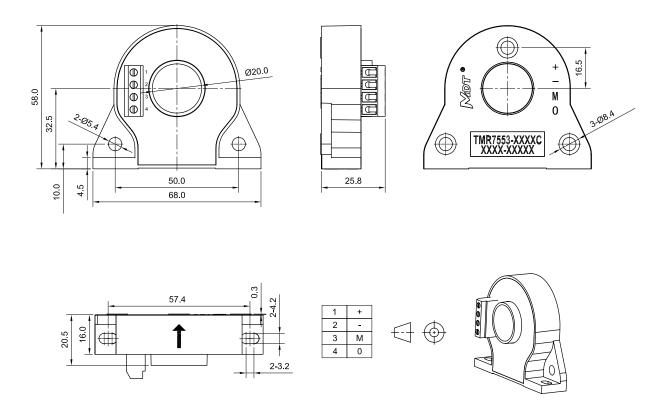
Dimension (unit: mm, tolerances for unmarked scales ±1 mm)
